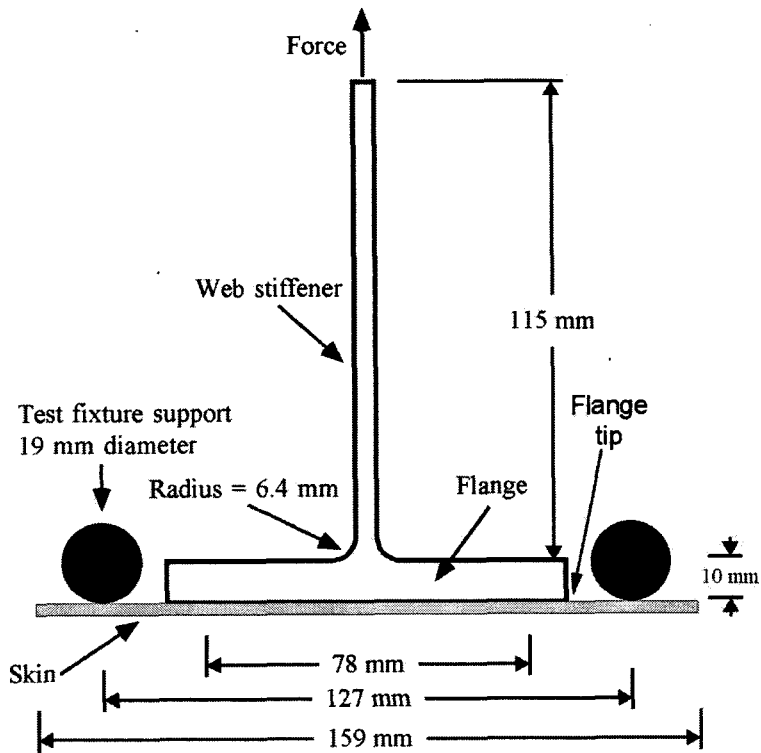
Geometry and Loading for Thick-Flanged Stiffener Tests.
